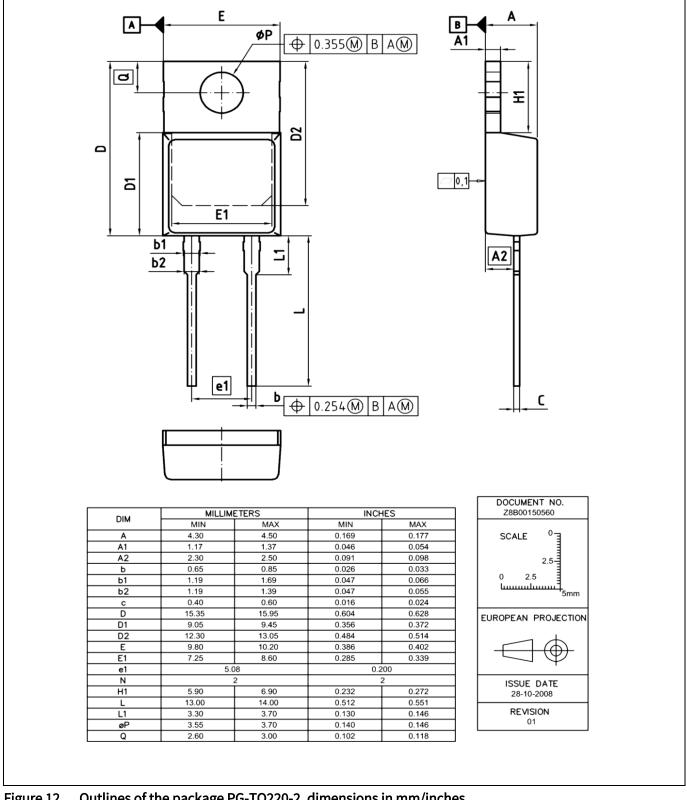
Outlines of the package PG-TO220-2, dimensions in mm/inches
